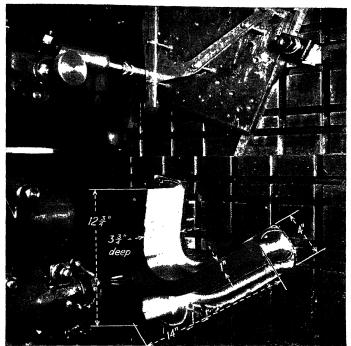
Trimming punch cut to size from a sheet-metal template. This is done here on a Keller automatic toolroom machine. (Keller.)
